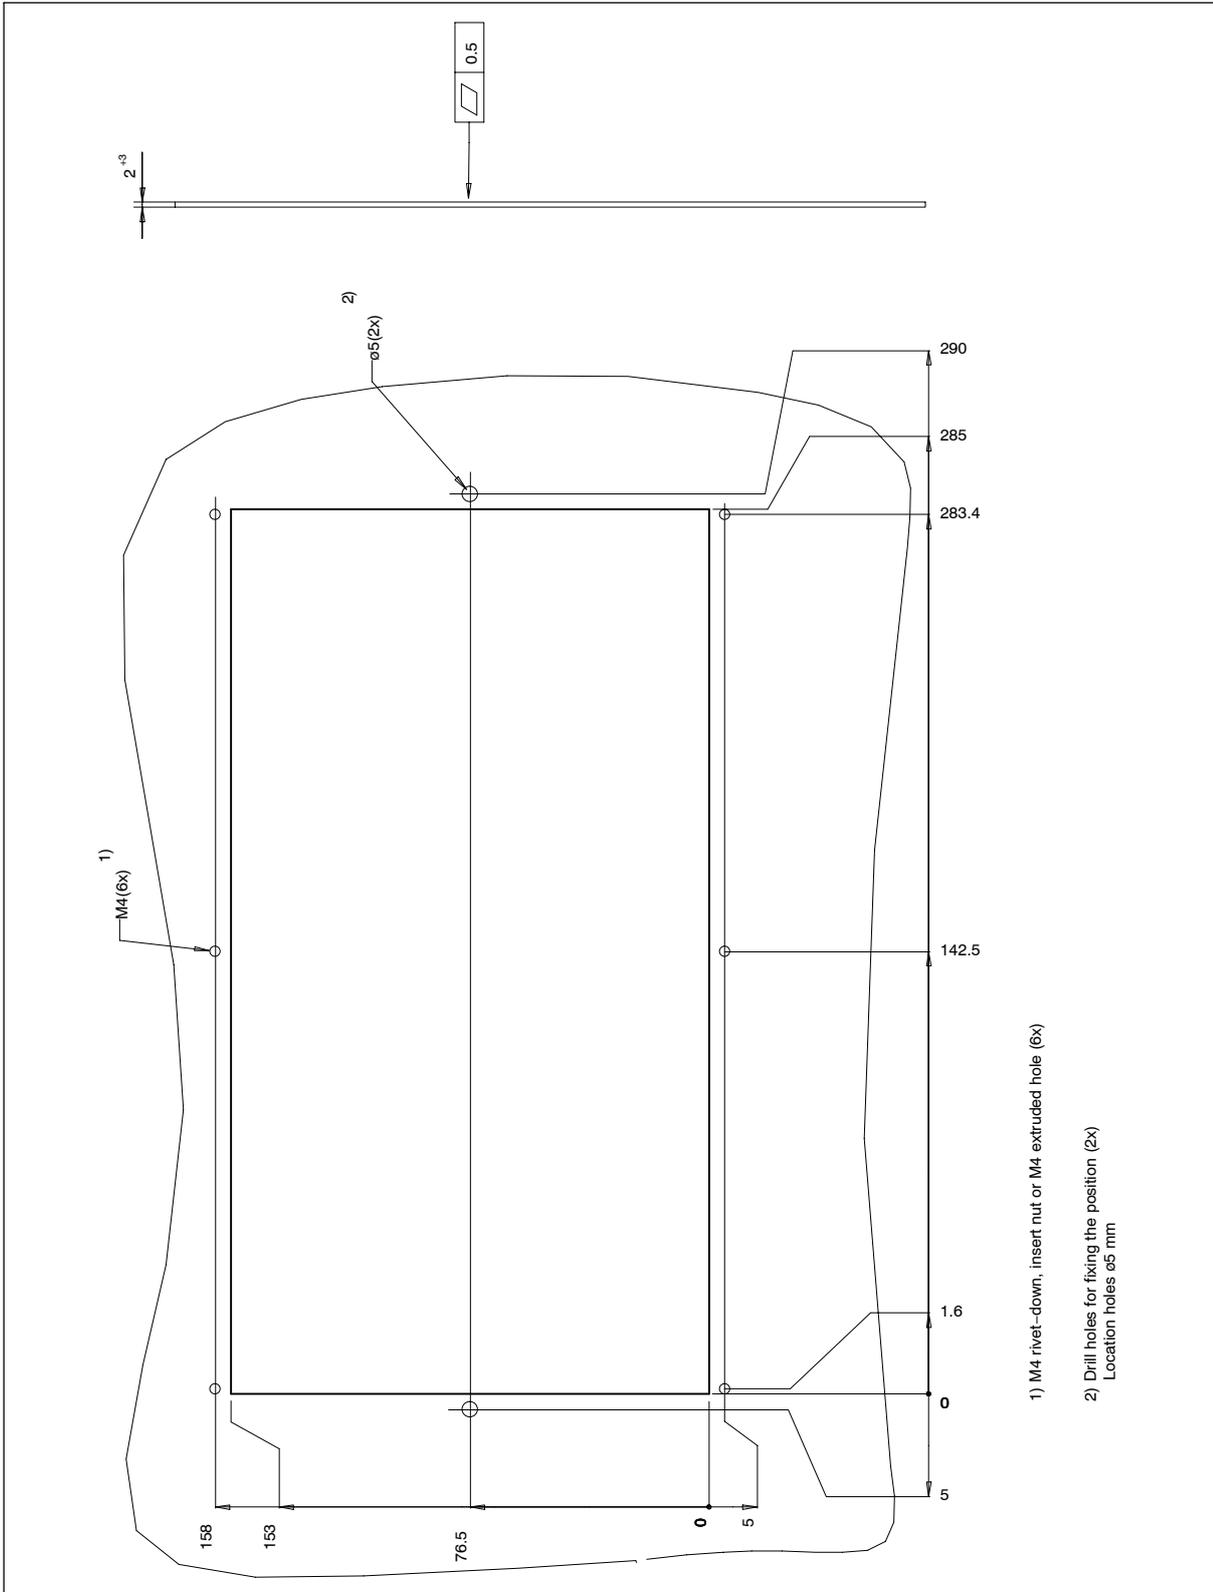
Drilling pattern for the keyboard (horizontal layout for installation beneath the PCU)
